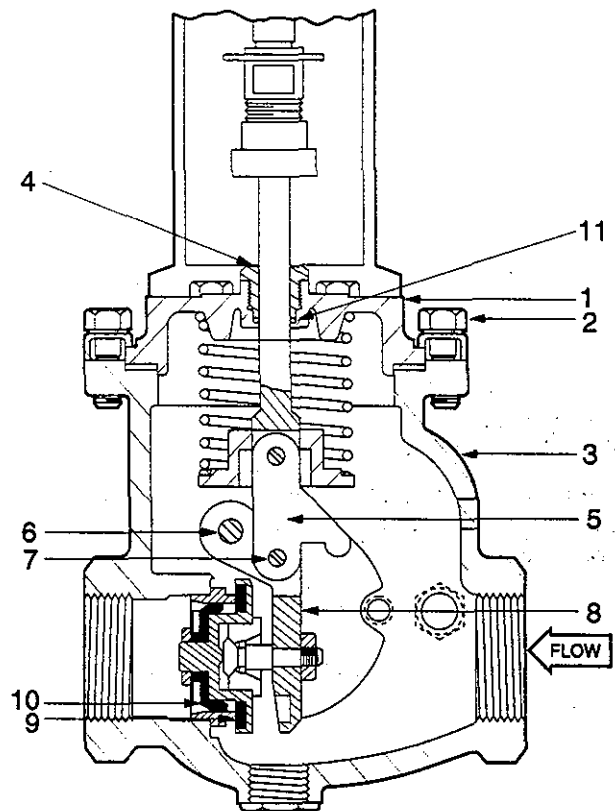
Cross-section of Typical H137 Valve With Valve Overtravel Seal
